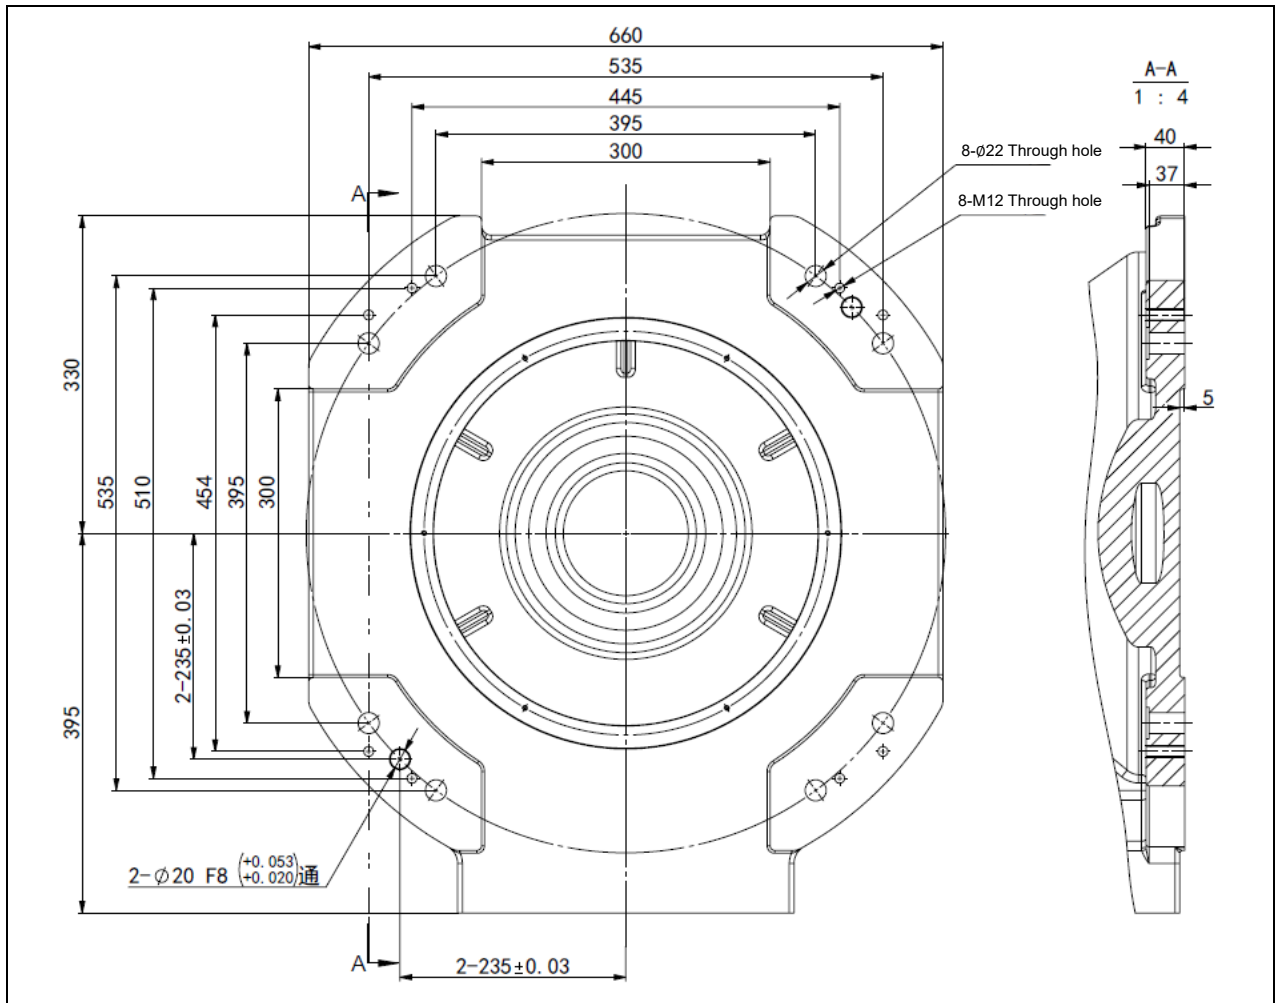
Robot base mounting dimension (ER100B-3500-DW)
